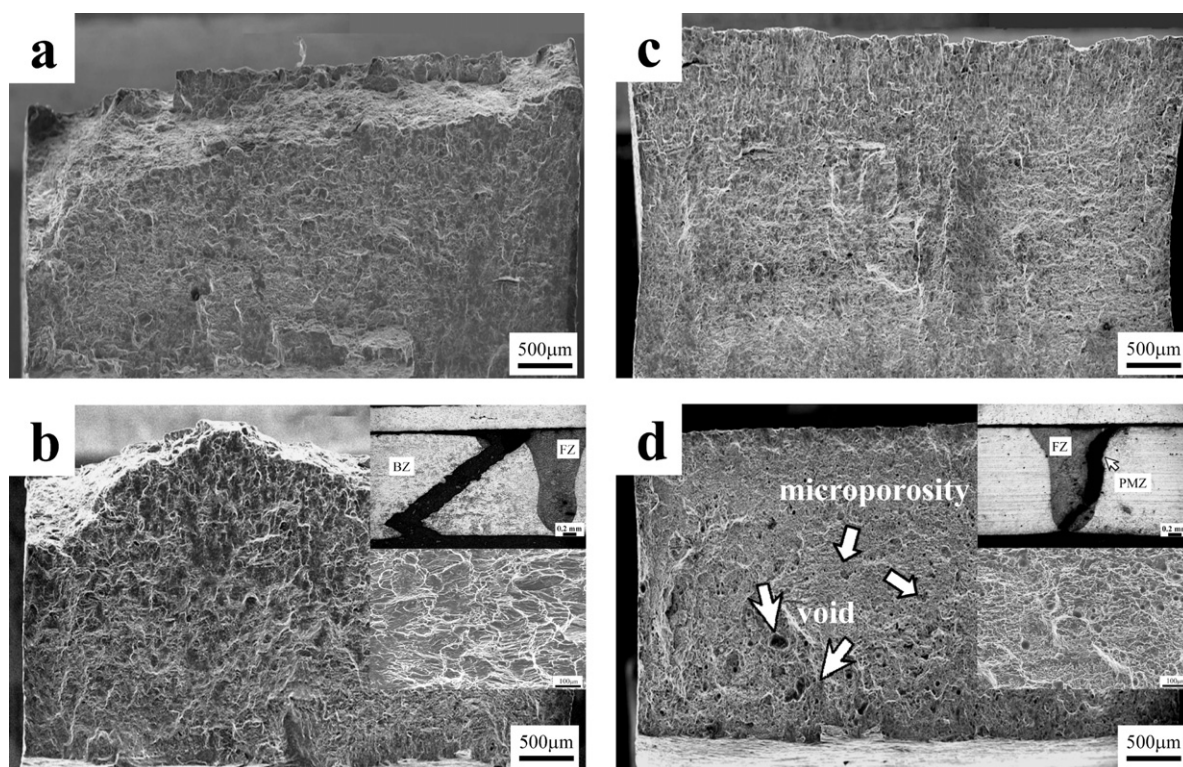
SEM and OM images of the fractured surfaces of AZ31 and AZ61 weldments: (a) AZ31 specimen prior to welding, (b) AZ31 specimen following welding, (c) AZ61 specimen prior to welding, and (d) AZ61 specimen following welding.
